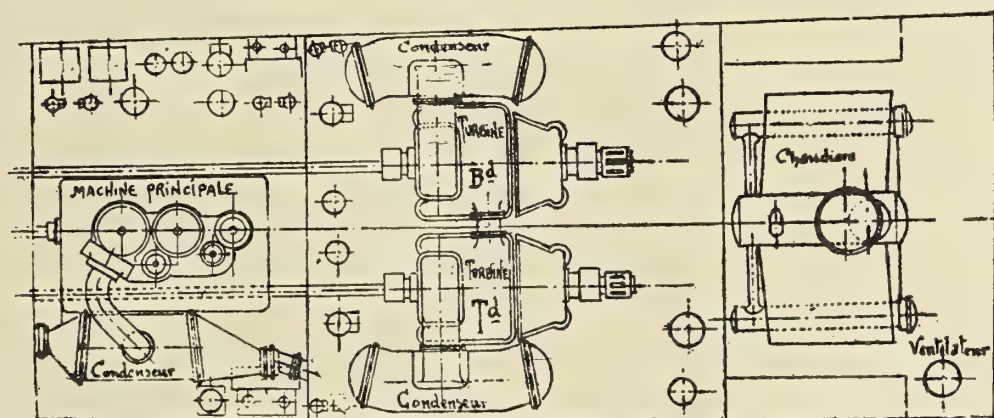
MACHINERY ARRANGEMENT OF THE VOLTIGUER.
